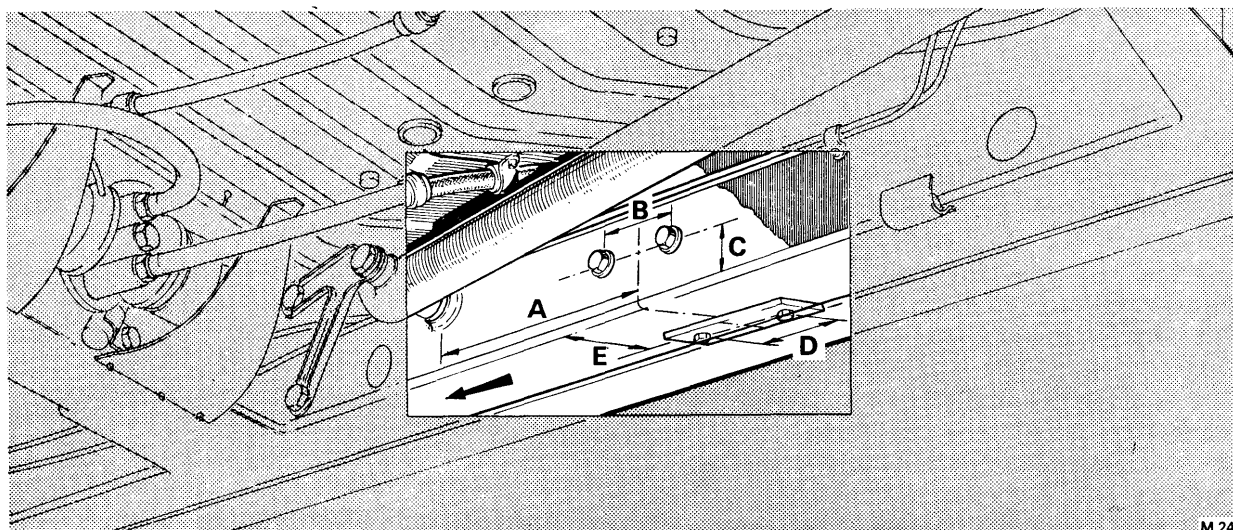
DRILLING DIMENSIONS FOR THE SILL CHANNEL (Early 4-Door Saloon and Long Wheelbase Non-division Cars)
